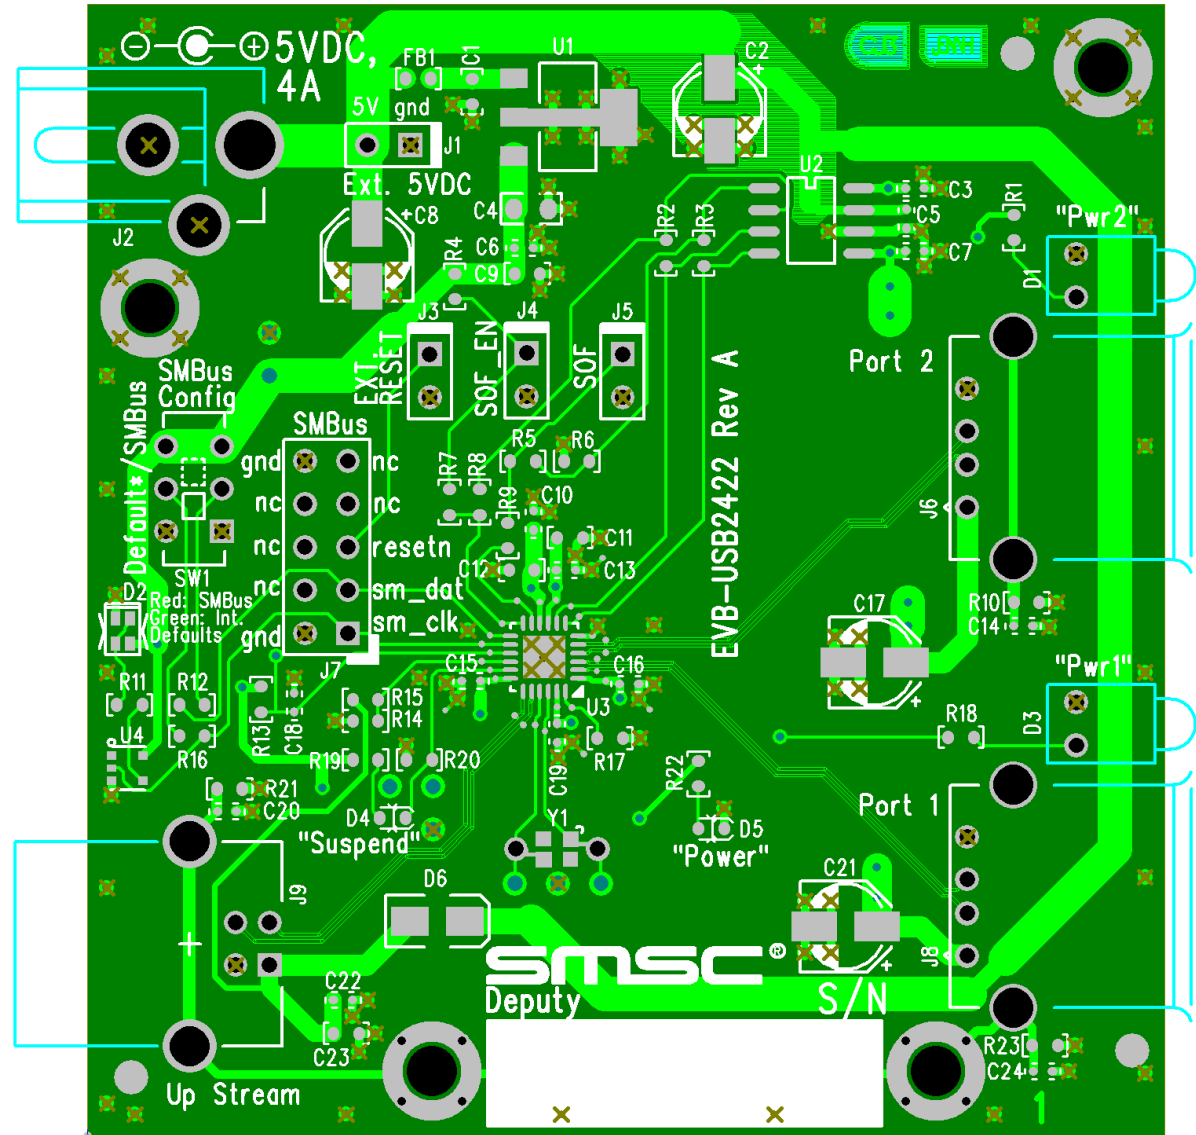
EVB-USB2422 Top Layer - Component Side
